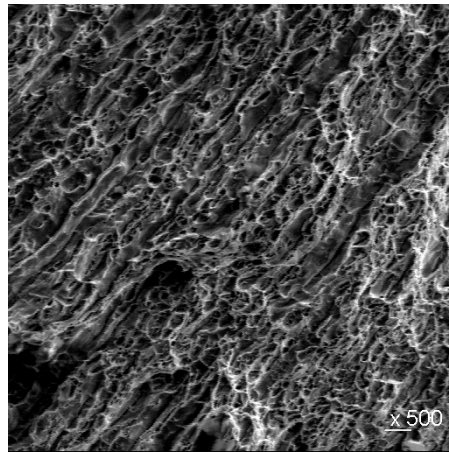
Tensile fracture surface, obtained outside the welded bead, in the base metal of AISI 1020 low carbon steel, after testing a dissimilar welded joint of austenitic stainless steel and low carbon steel, using welding parameters $I_w=19$ mA, $I_f=875$ mA and $v=8$ mm/s.
